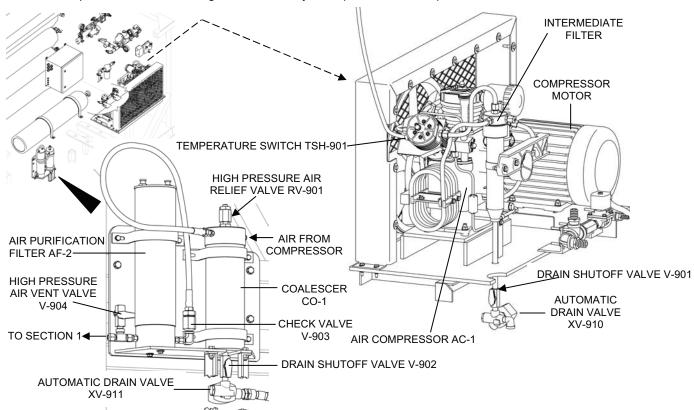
Air System: Air Compressor Assembly and Two-Stage Filtration System.
